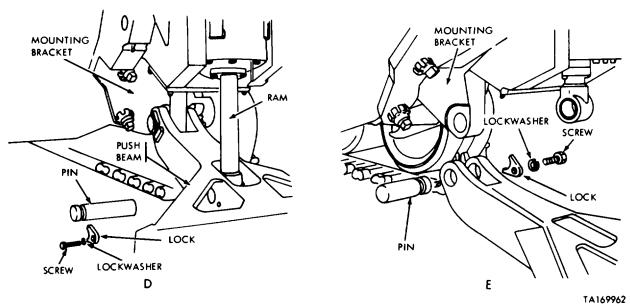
Removal or Installation of blade assembly (sheet 2 of 2)
